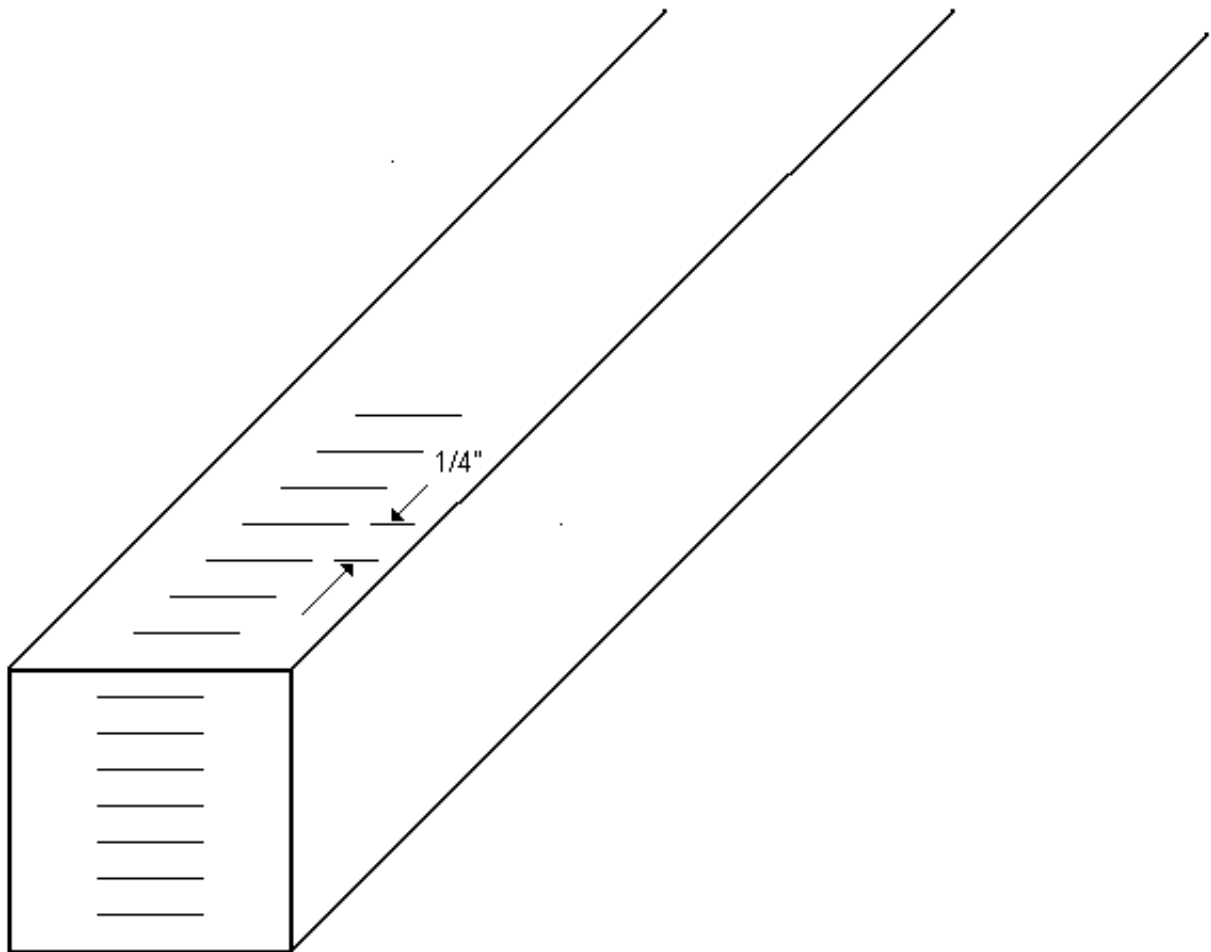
Index marking layout for shear wave pitch-catch end scan of large bar, rod and forgings.
